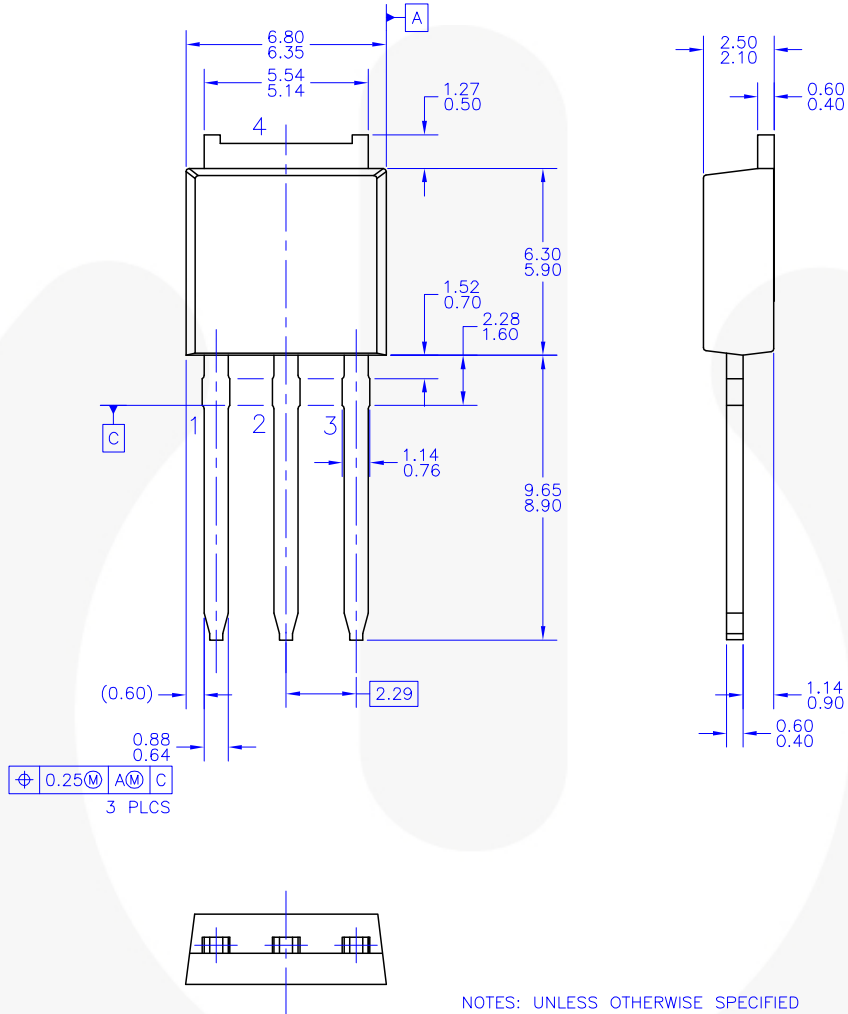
TO-251 (IPAK) MOLDED, 3-LEAD
